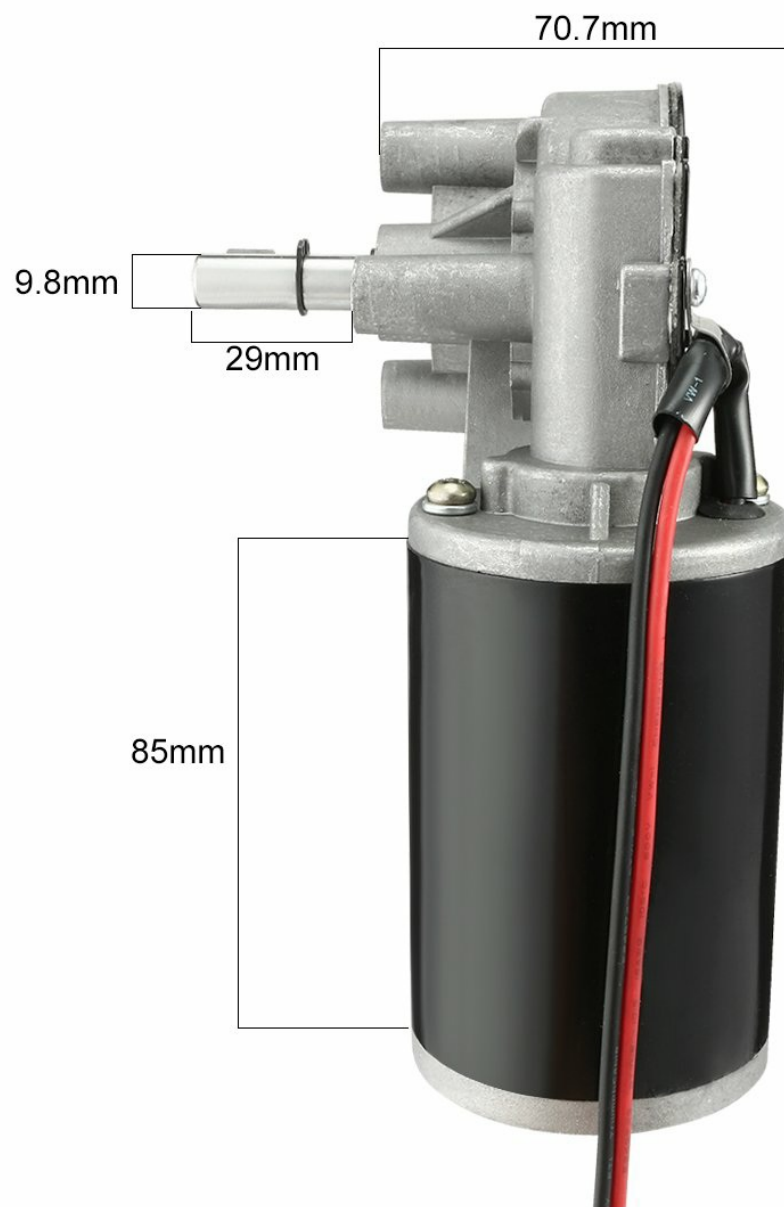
Side view with additional dimensions, including shaft length and gearbox depth.
